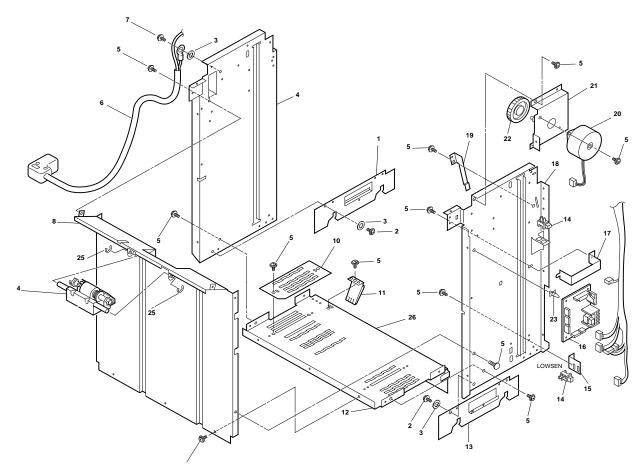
LCIF Paper Feed Assembly Parts Locational Diagram
